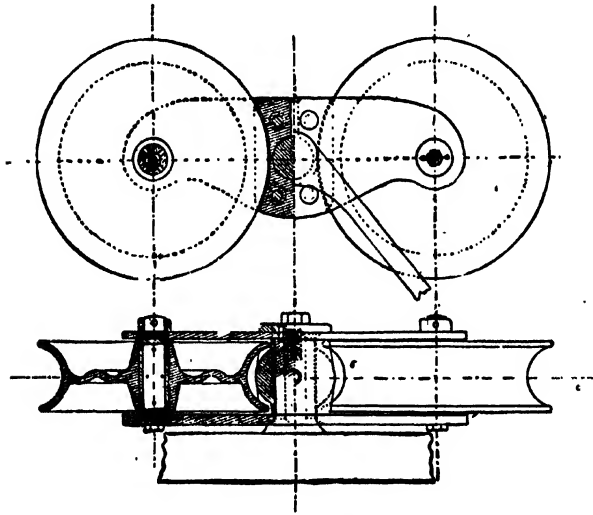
Carrier Truck or Runner. Sectional Plan and Elevation.
